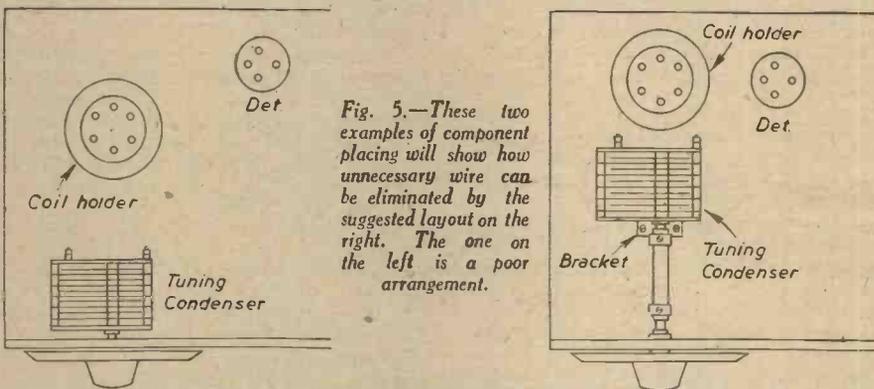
These two examples of component placing will show how unnecessary wire can be eliminated by the suggested layout on the right. The one on the left is a poor arrangement.
